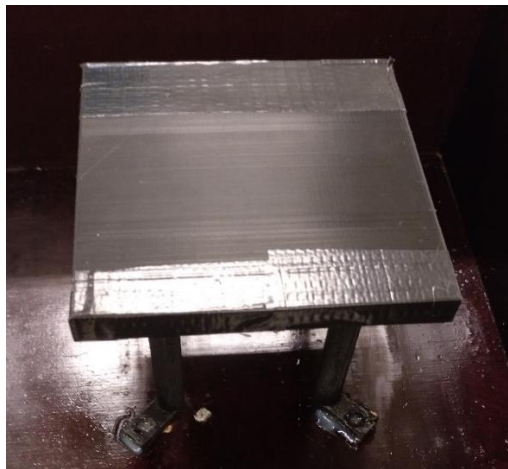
3D PRINTED PARTS ATTACHED WITH GLUE
